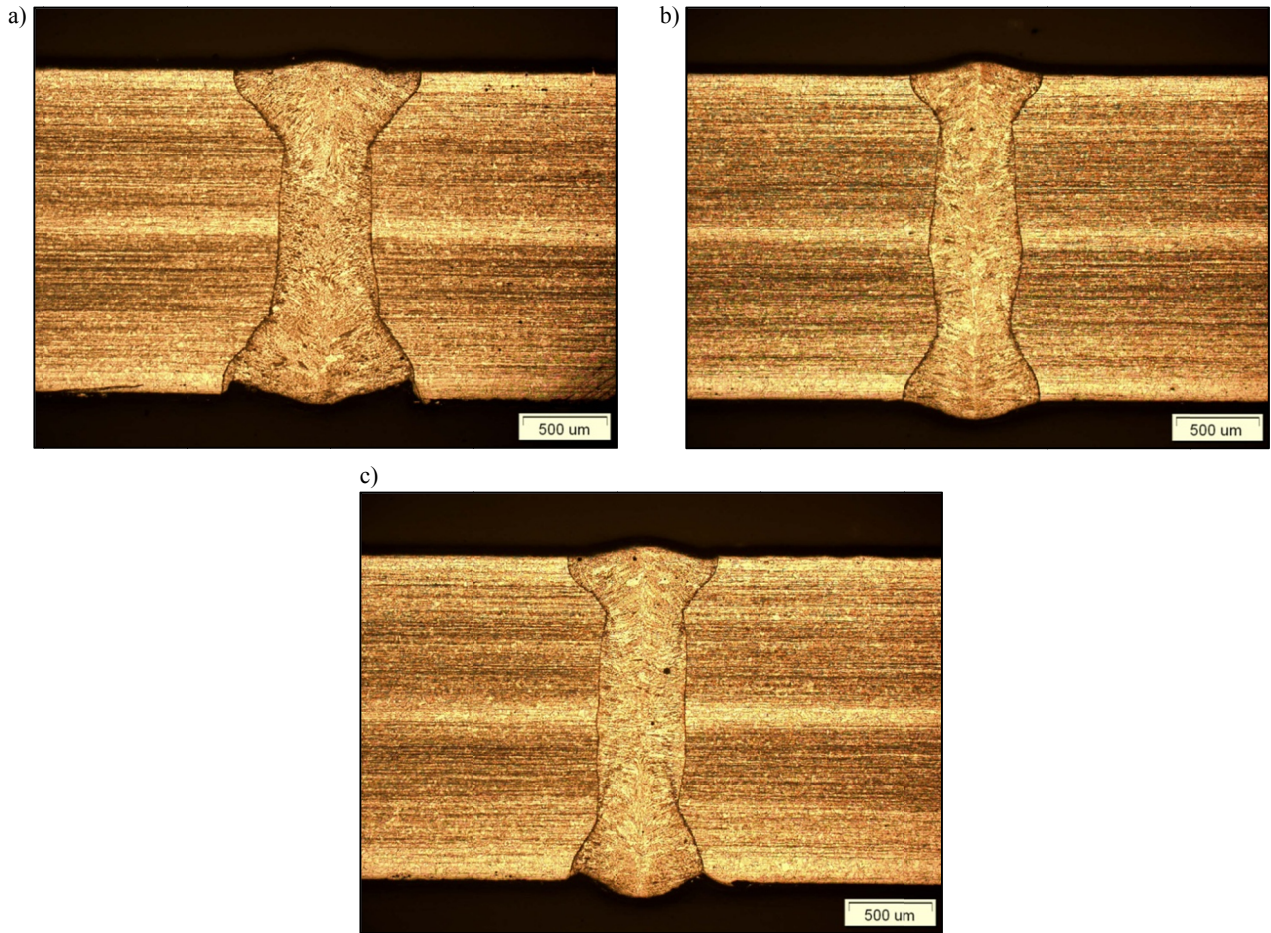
Macrostructure on cross sections of the simulated welds produced on AISI 304 steel sheets 2.0 mm thick by bead-on-plate laser welding at constant focal spot positions 1 mm below the top surface and different energy inputs (Table 3); a) 30 J/mm (1.0 kW, 2.0 m/min), b) 22.5 J/mm (1.5 kW, 4.0 m/min), c) 20 J/mm (1.0 kW, 3.0 m/min)
